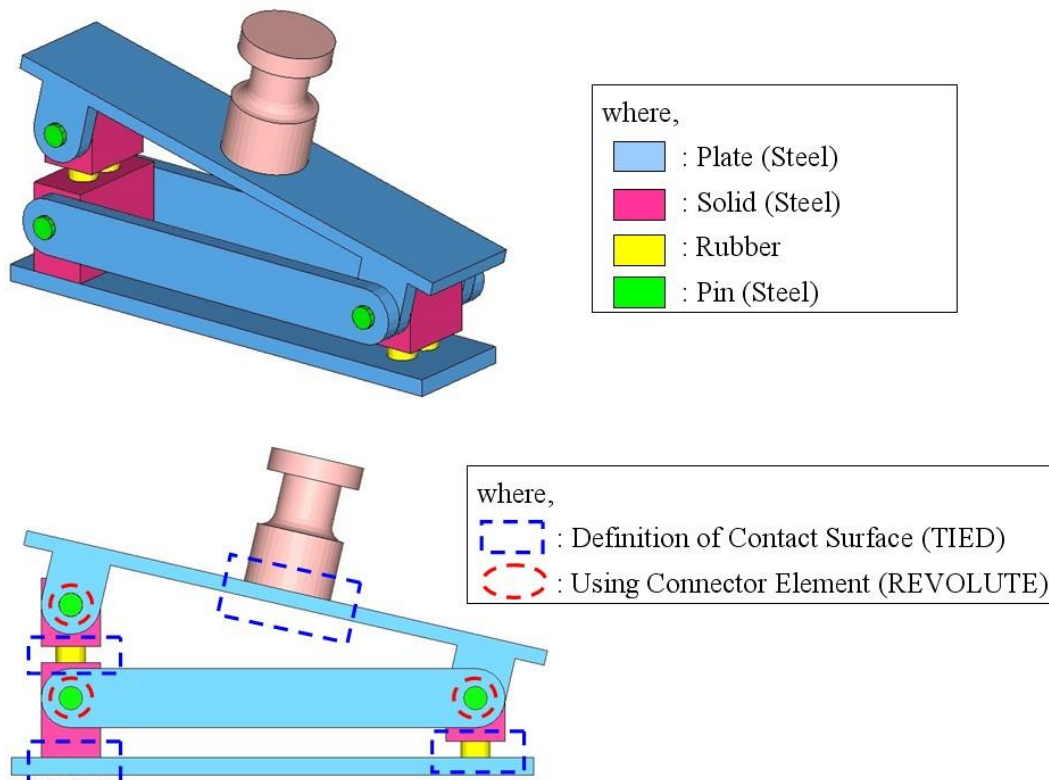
The FE Test Jig Model for Aluminum Wheel Impact Analysis
